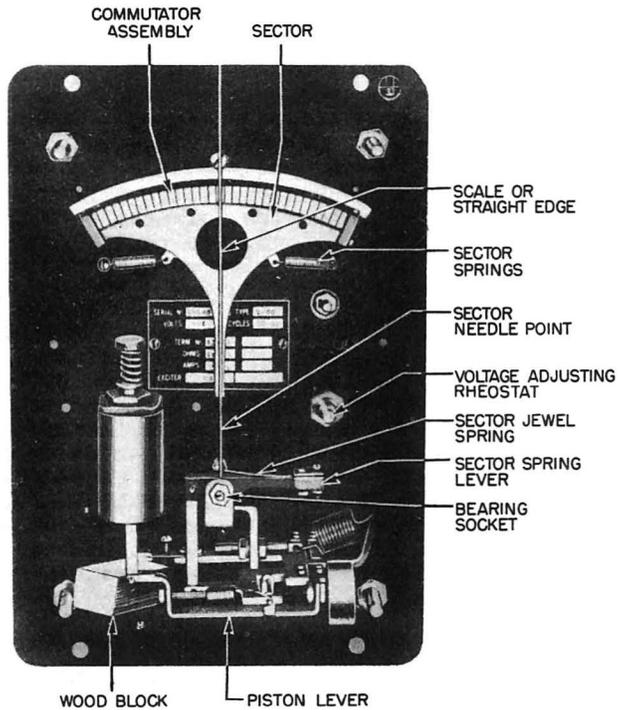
Checking Position of Sector in Commutator of Allis-Chalmers Voltage Regulator - Mechanically
